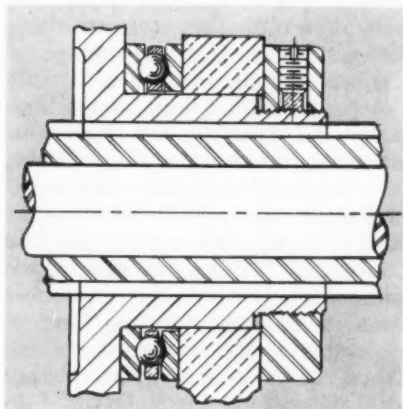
This lever type shifting shoe is connected to a shaft parallel to axis of assembly.
